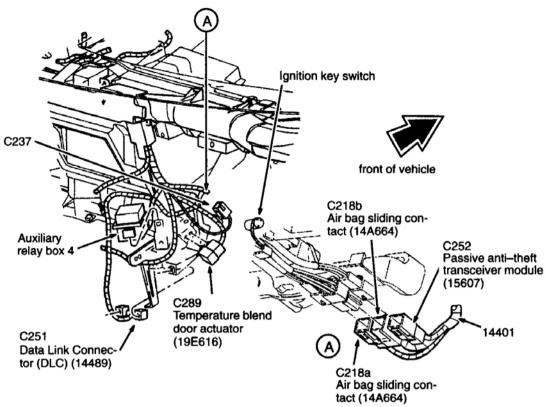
Locating Auxiliary Relay Box 4 Courtesy of FORD MOTOR CO.
